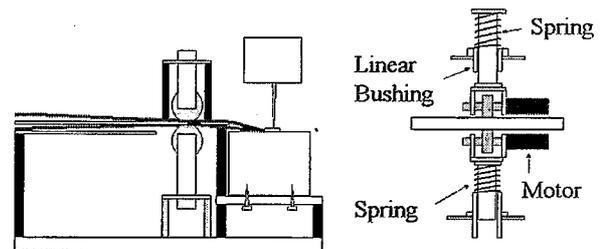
Schematic Drawing of the Automated Sewing Machine.
